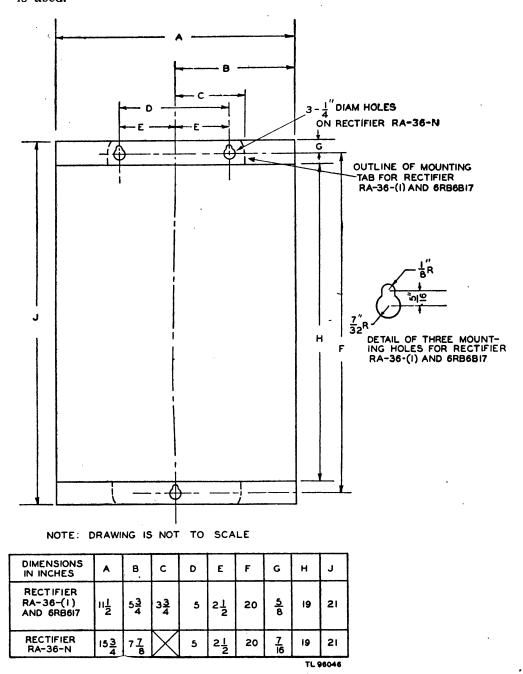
Rectifier RA-36-(*) and rectifier 6RB6B17, dimensional outline.
